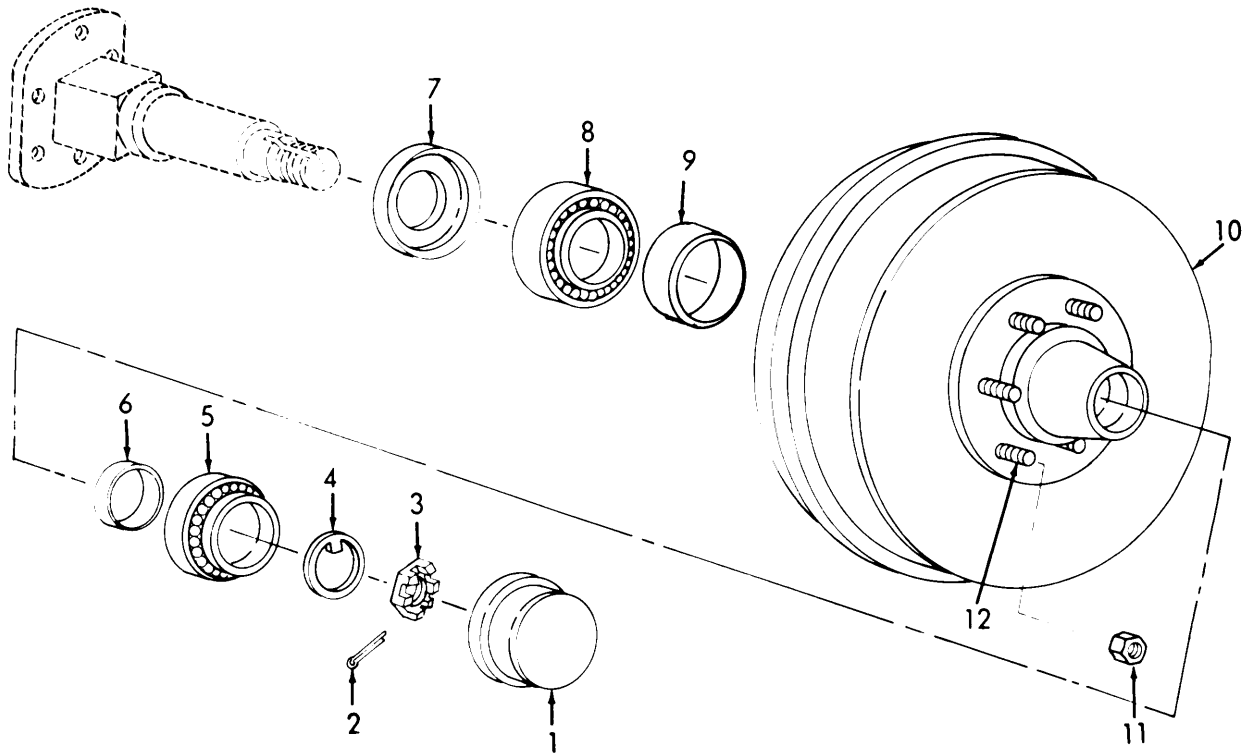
Front and Rear Brake Drums and Wheel Bearings.
